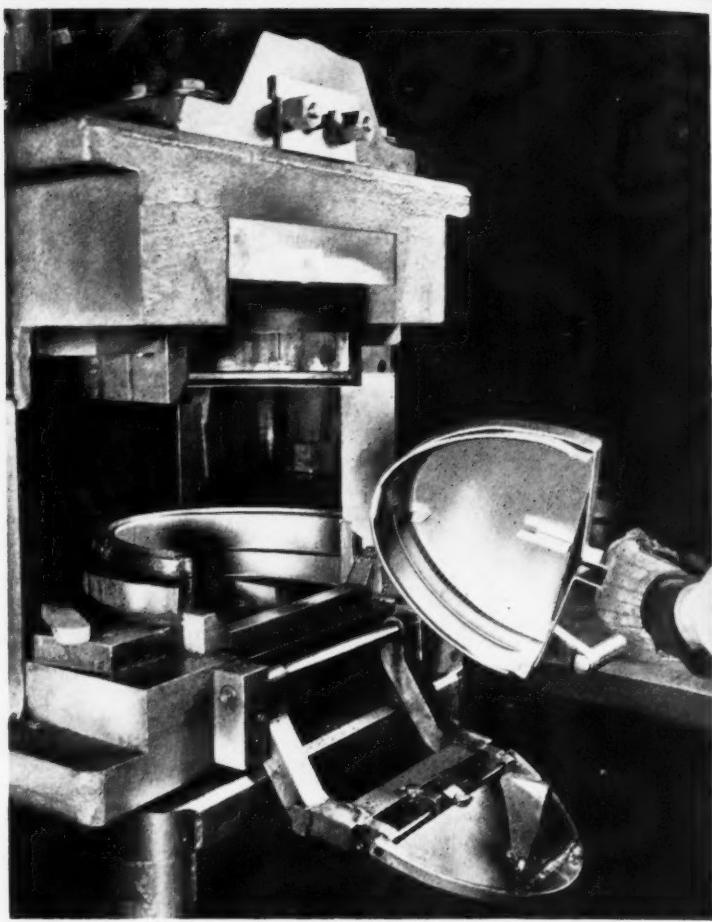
Unique Power Press Operation, in which Flanges Extending around Heater Stampings are Clinched Together
